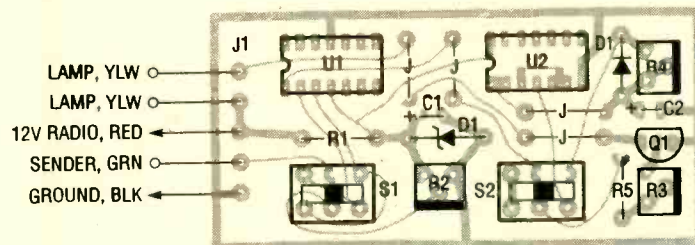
Here's the printed-circuit board's parts-placement diagram. Careful attention should be paid to component orientation, which will prevent most construction errors.
